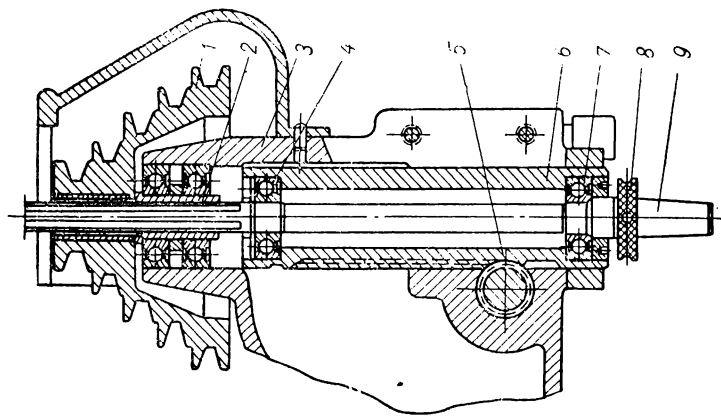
Spindle assembly of the bench-type drilling machine, model HC-12A
